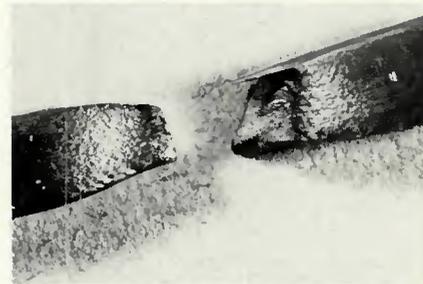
Appearance of fractured tensile test specimen containing welded joint in high-filament-density superconductor
